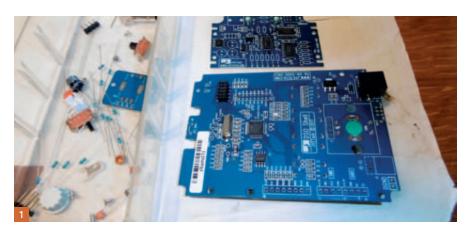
The kit. The surface mount components arrive already mounted and soldered.
